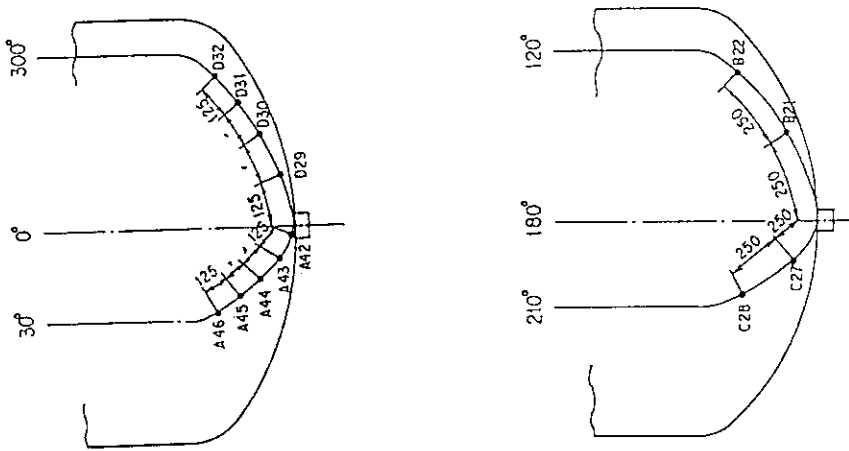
Thermocouple positions on the outer surface of the pressure vessel - lower head
